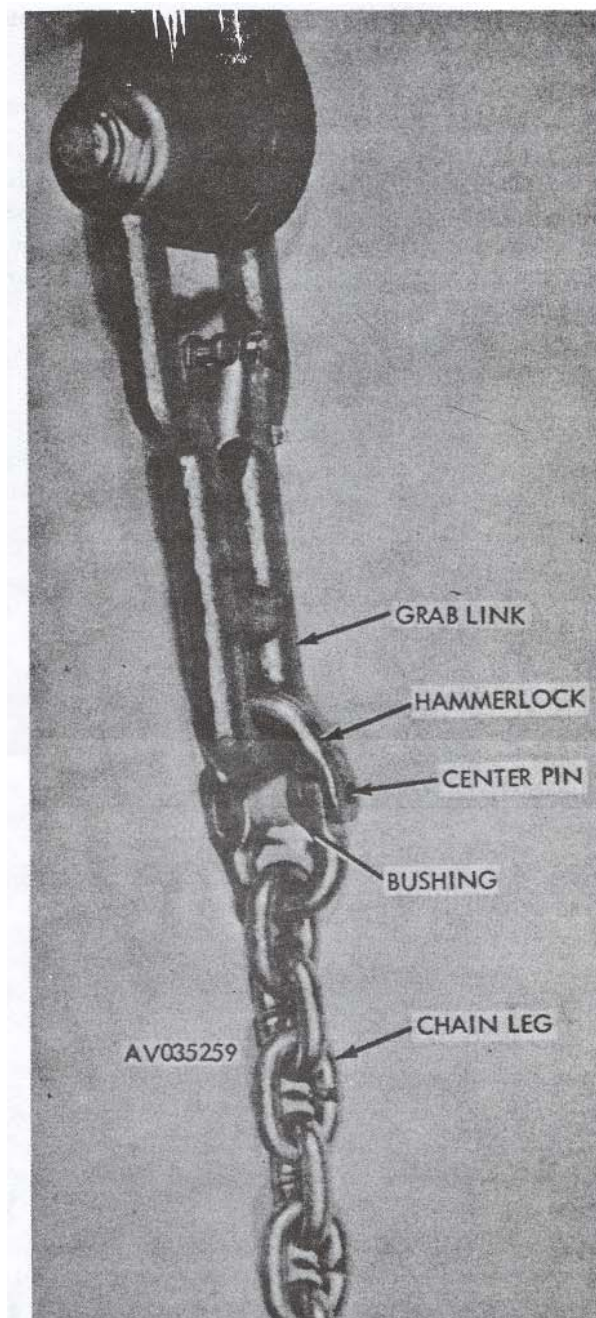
A. Hammerlock Installed Between Chain Leg and Crab Link Assembly.
